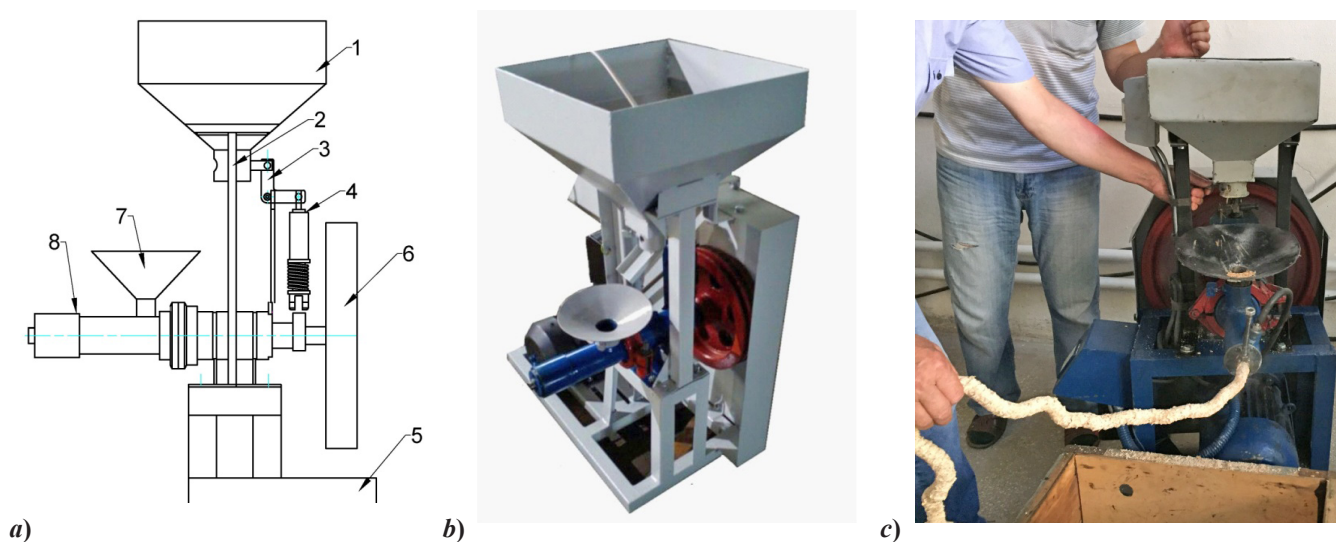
Extruder PE-20: a – schematic view; b – general view; c – extrusion process; 1 – hopper; 2 – hopper carrier; 3 – mixture feed mechanism; 4 – pusher; 5 – frame; 6 – driven wheel; 7 – receiving funnel; 8 – working part
